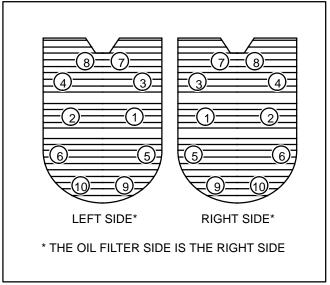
CYLINDER HEAD BOLT TORQUE SE-QUENCE
